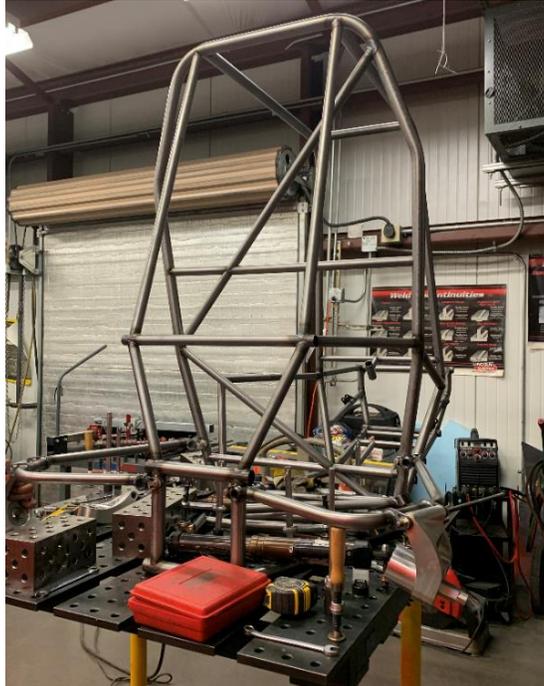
Rear-View of Chassis, Rear-End Shock Member
